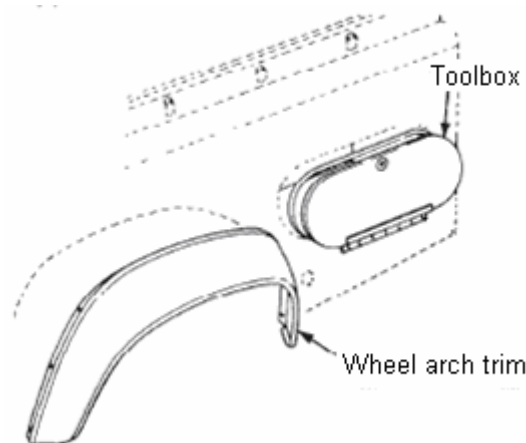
Toolbox and Wheel Arch Trim – Left Side
